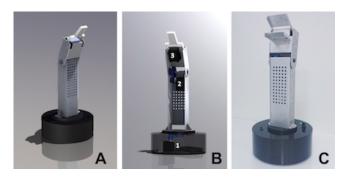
CAD design of the puppet's body (A); An open view of the CAD design with the motors numbered (B); The actual protoype (C).
